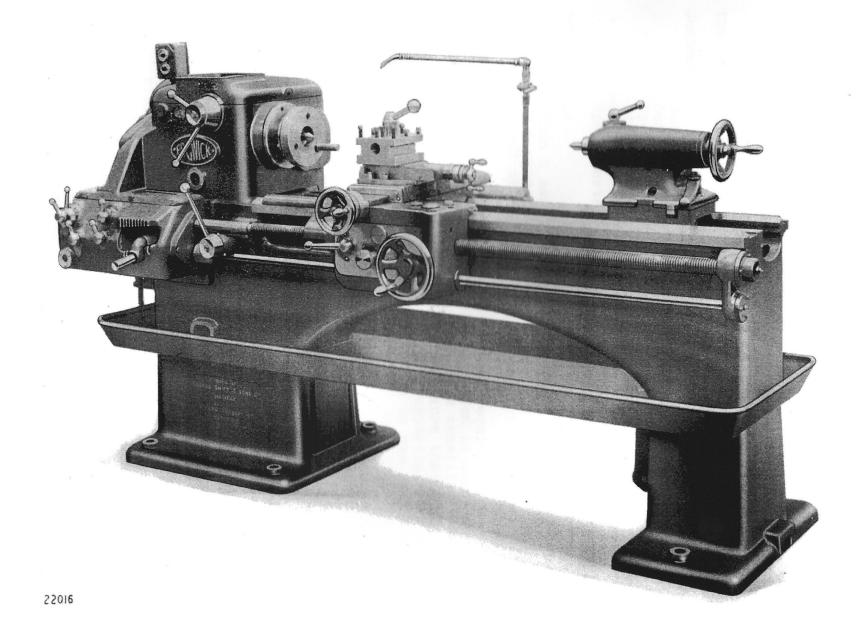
Edgwick c 2" Gap-bed Lathe Sliding, Surfacing and Screwcutting.
